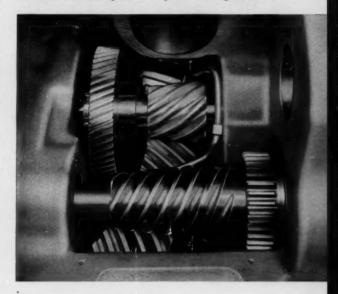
Two pinions in machine tool mesh with same gear in compact assembly, one being a 5-tooth HRH pinion and the other a 9-tooth spiral bevel pinion running on center.
